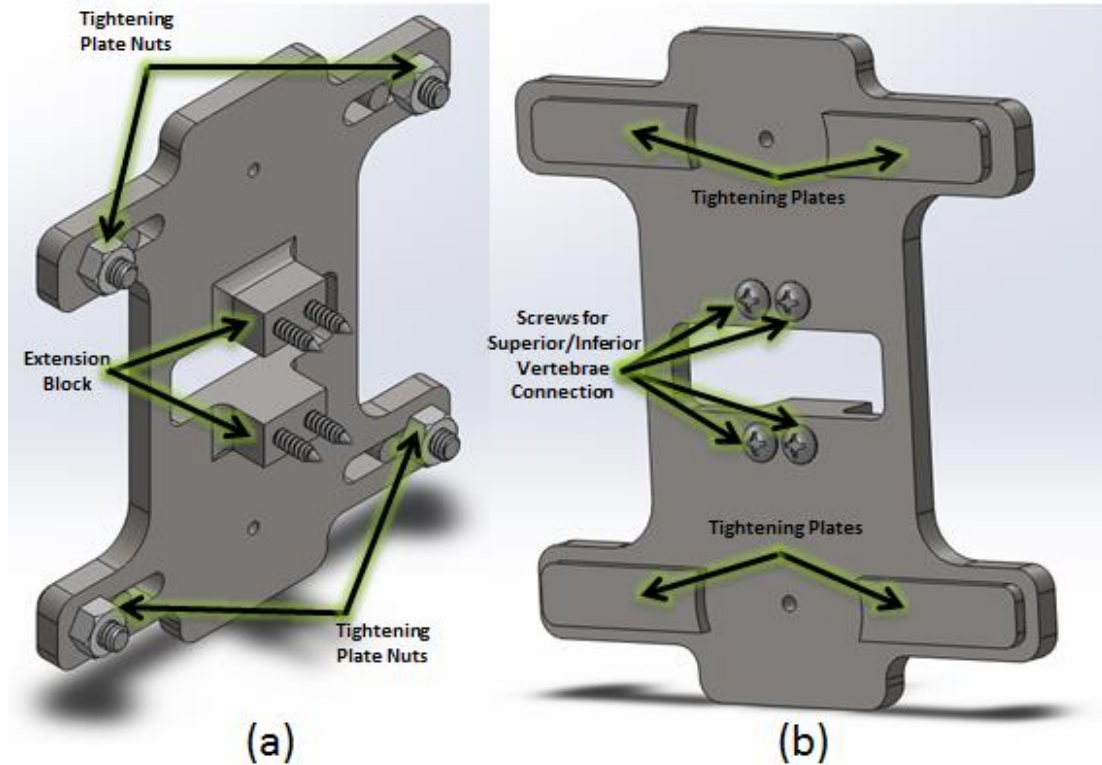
Posterior Fixture Front Plate – Part (a) is an isometric view of the front plate, with labels for the tightening plate nuts and extension block, while part (b) is a back side isometric view of the front plate, with labels for the tightening plates, screws for middle vertebrae connection, and teflon sheets. Note: teflon sheets are not included, and it was found they were unnecessary.
